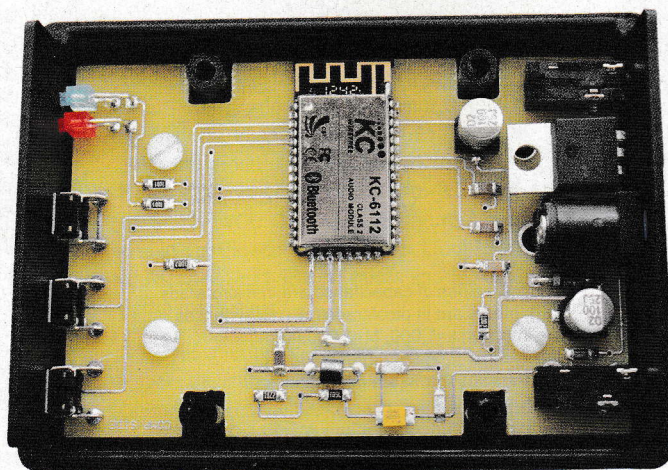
The Bluetooth module in the top center of this prototype circuit board sports a folded "meander line" antenna.
